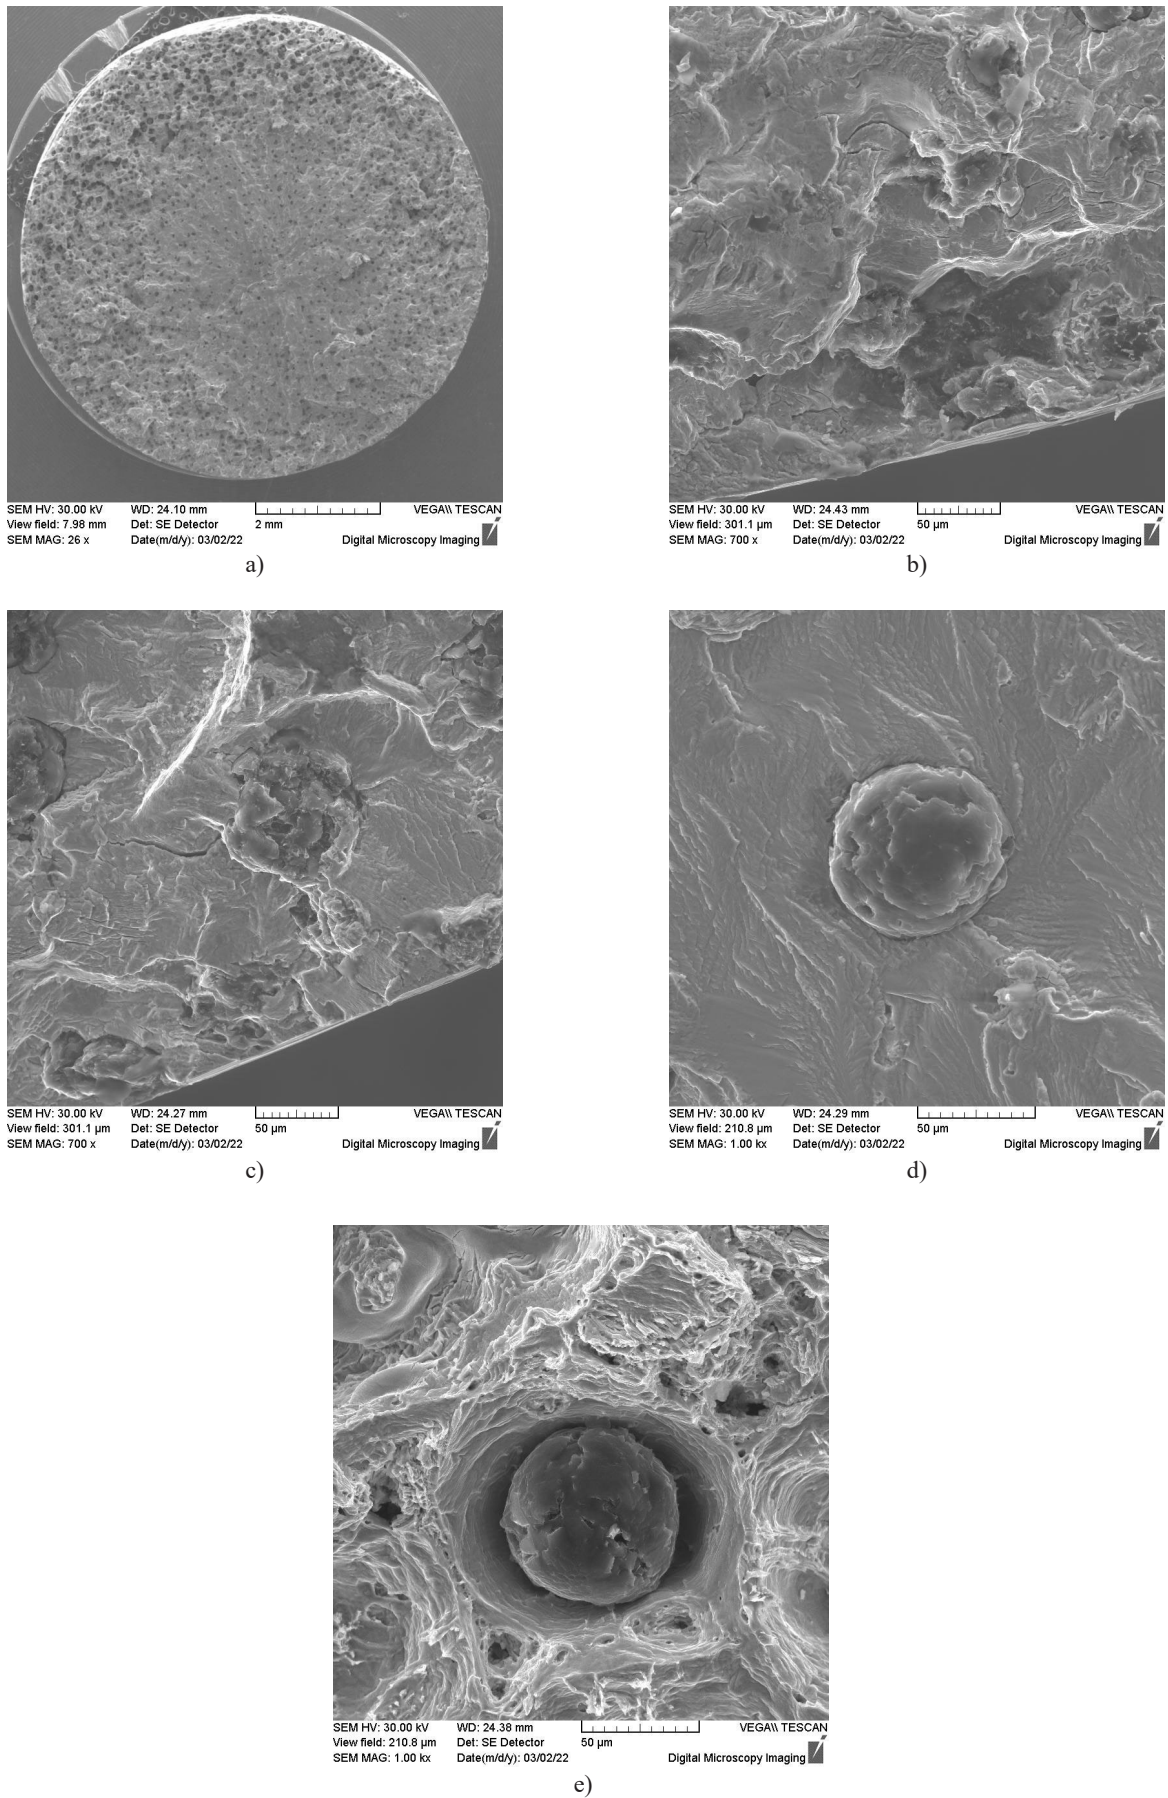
Fracture surfaces of analysed specimens; a) general view of fracture surface after fatigue failure; b) initiation of fatigue failure by a casting defect; c) initiation of fatigue failure by a crack under the surface; d) transcrystalline fatigue failure; e) transcrystalline ductile failure in the area of final rupture
